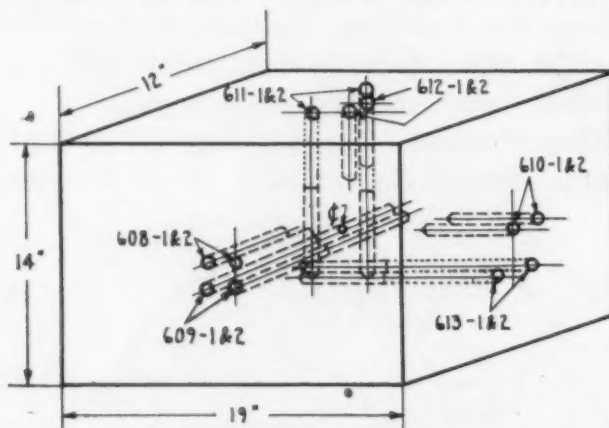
Core Drill Tests from Full Size Prolongation Number 1 of Flywheel Casting.
